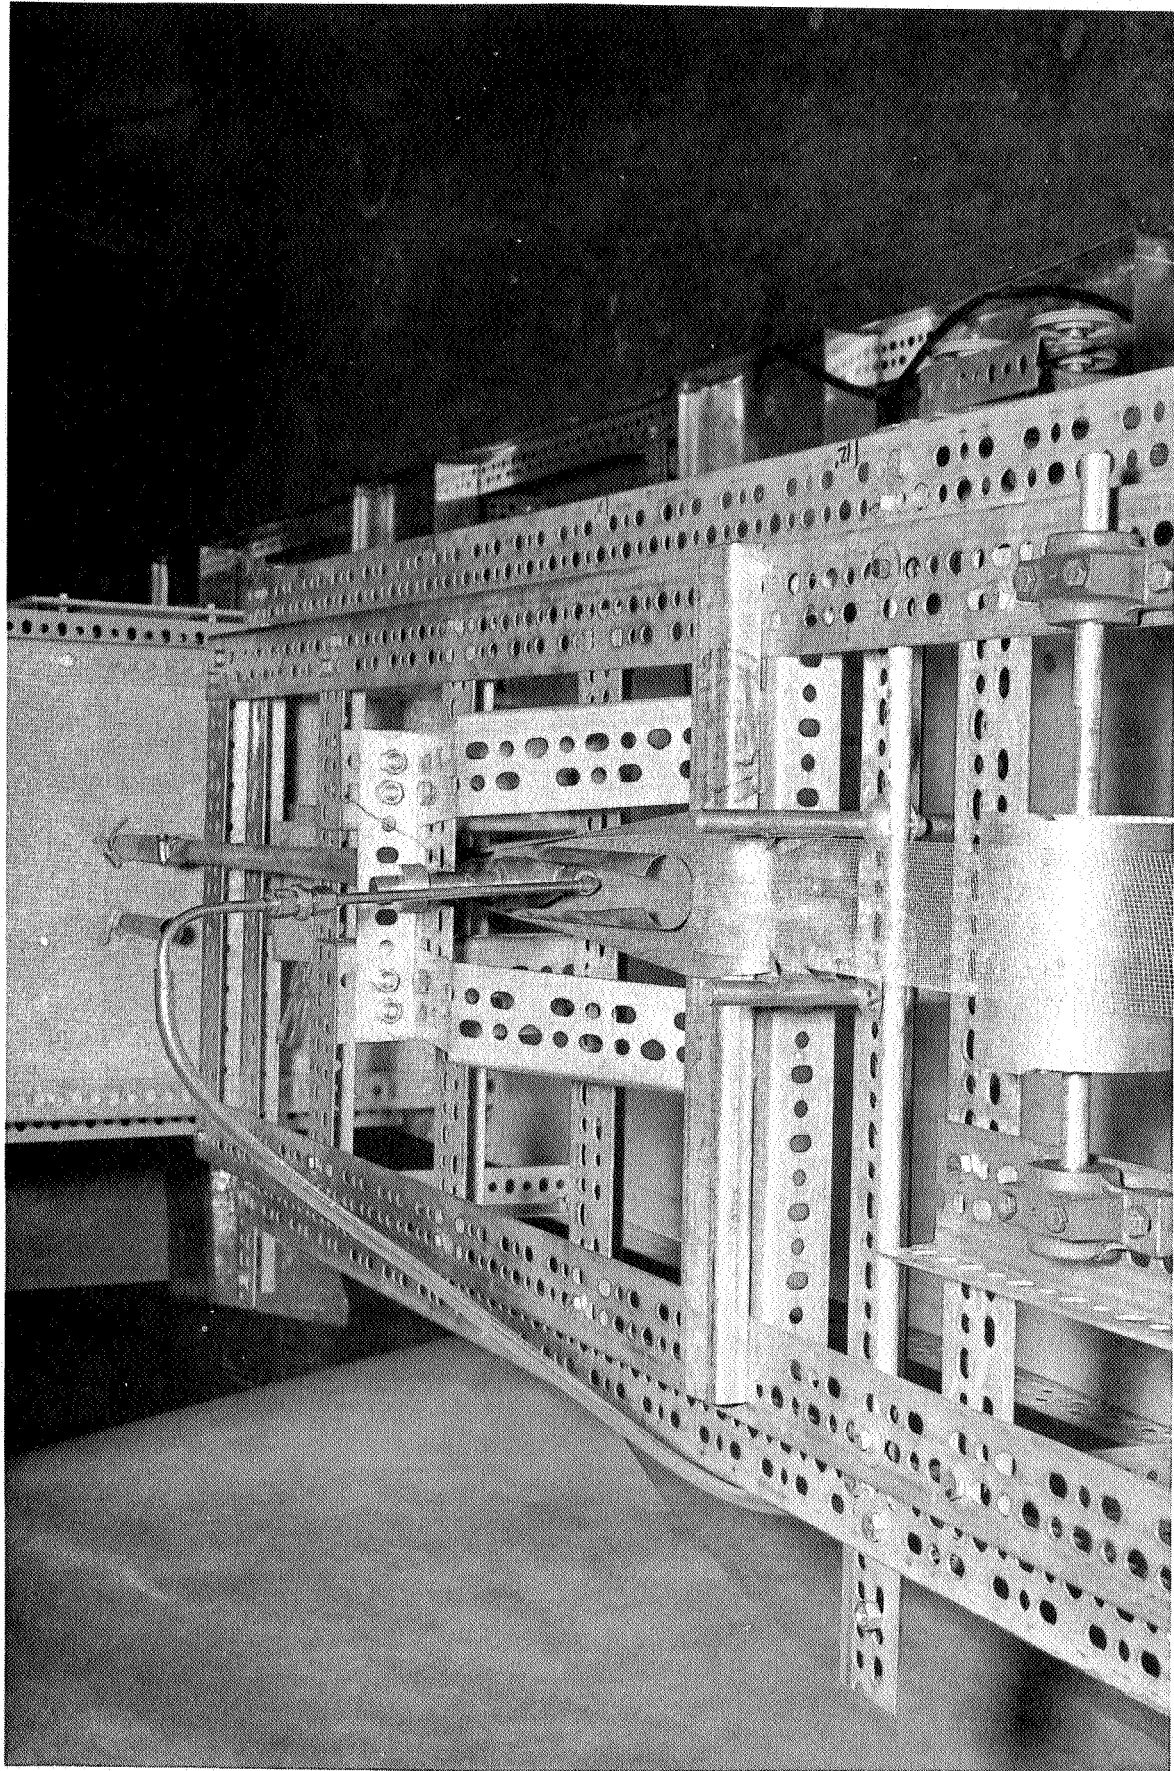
MOD I Continuous Tube Forming Furnace, End View, Showing Screen Cold Forming Nozzle
